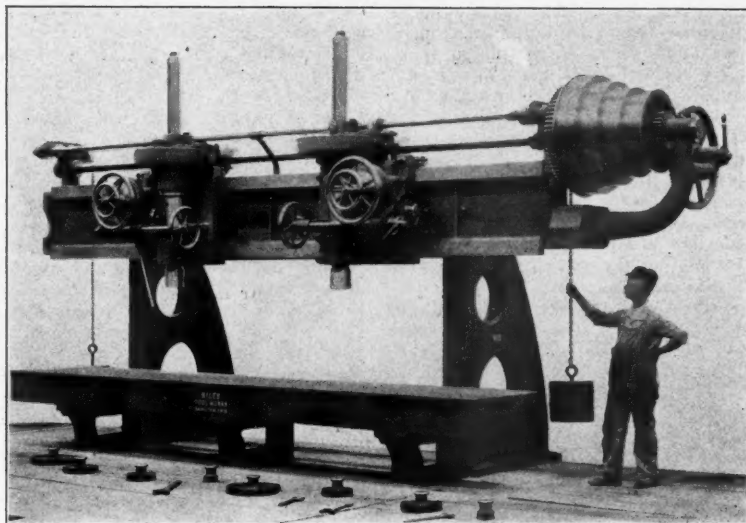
The Niles-Bement-Pond Locomotive Rod Boring Machine.
